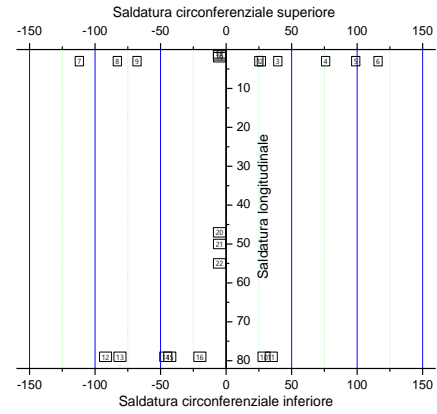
UT mapping of circumferential and longitudinal weld joints
